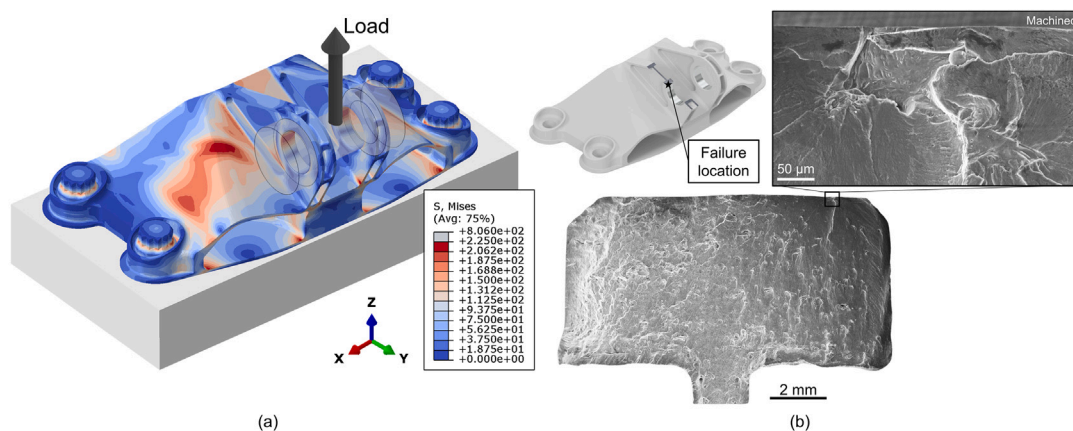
(a) FE von Mises stress distribution of the bracket under the applied loading condition [62]. (b) Fracture surface of the component showing crack initiation at the lug, in a machined area [39].
